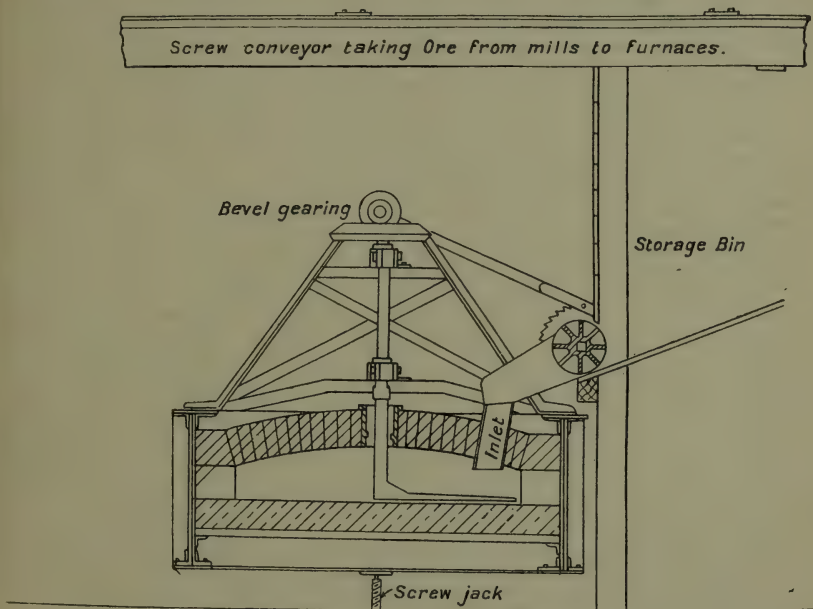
Section through Receiving End of Edwards Furnace showing Fluted Roll Feeding.
